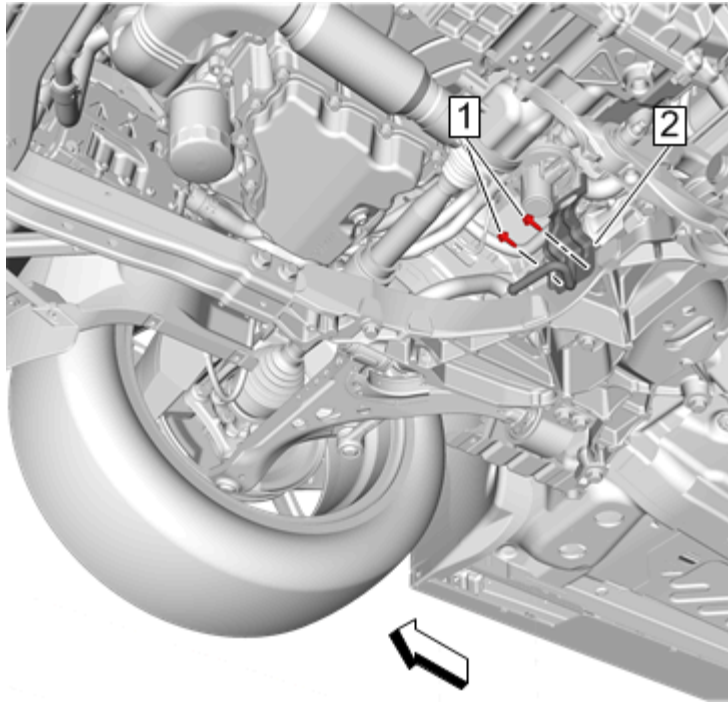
Heater Water Bypass Valve Bracket Bolt And Heater Water Bypass Valve Bracket
